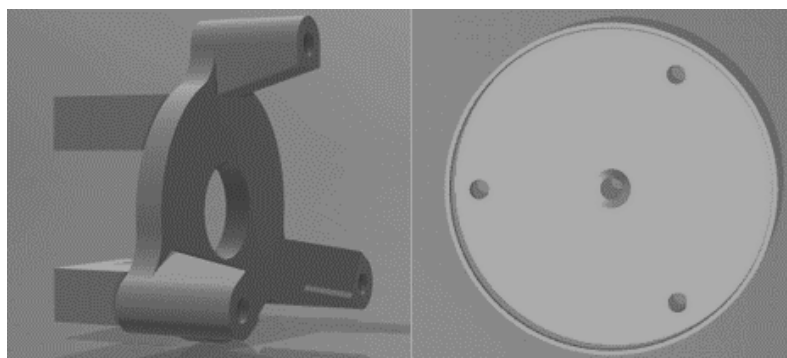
Spray cone diverter: mounting bracket for attachment to spray can and bottom plate which attaches to the mounting bracket using three screws.
